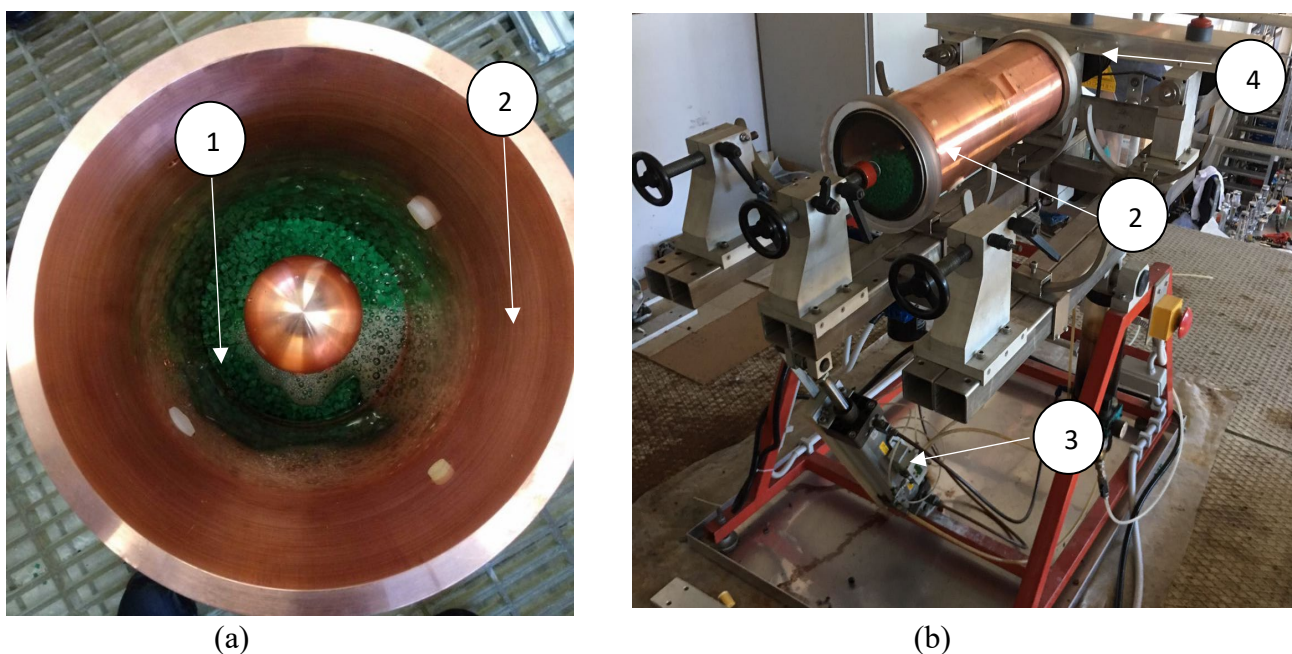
Internal view of the QWR cavity during the tumbling process (a), mounted to the tumbling system (b).
